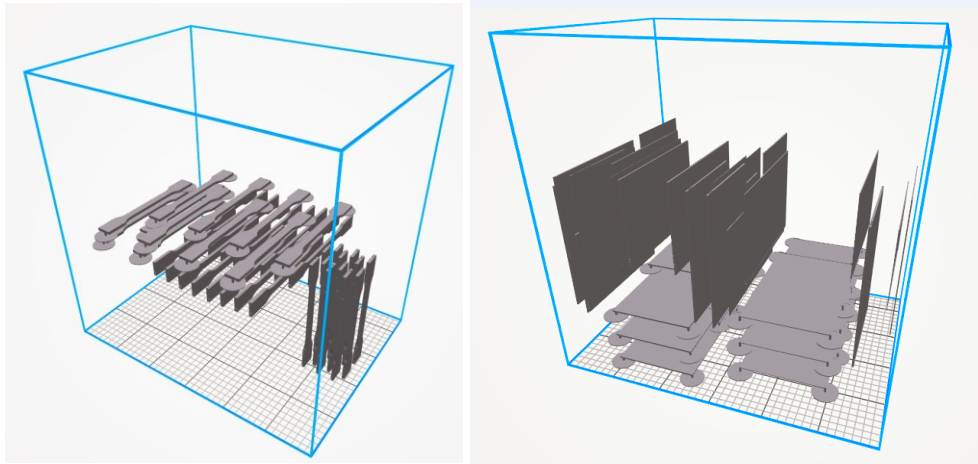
HP MJF nesting of specimen printing. Courtesy of Ajatec Prototyping OY.
